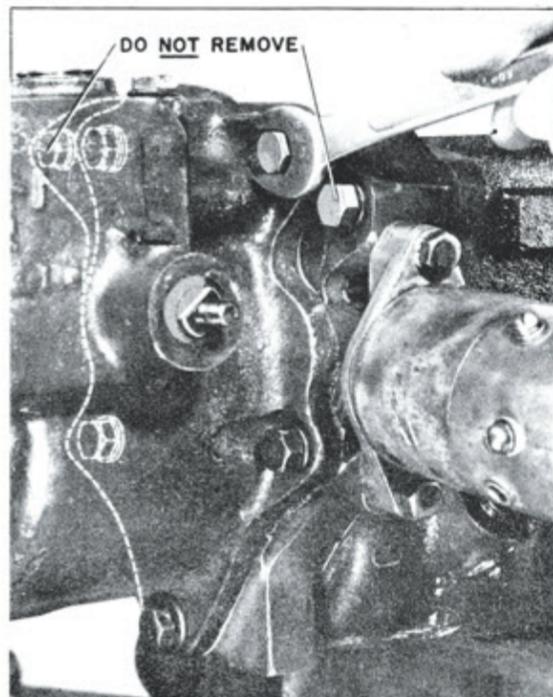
Do Not Remove Cap Screws Which Hold Adapter Plate to Transmission Case
